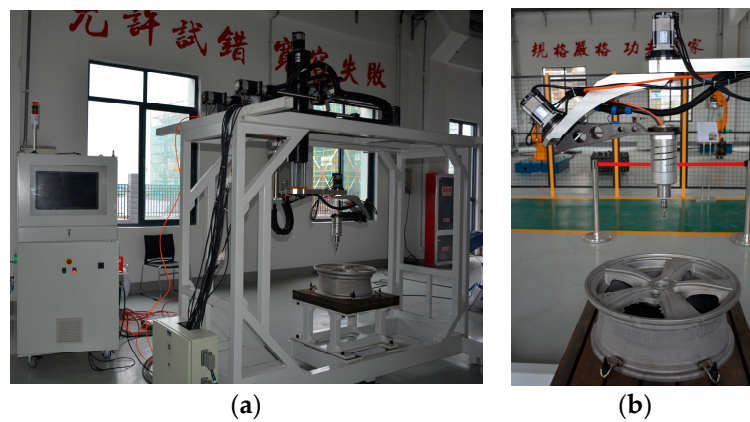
Experimental platform and automobile hub: (a) original experimental platform of robot manipulator; (b) automobile hub workpiece.
